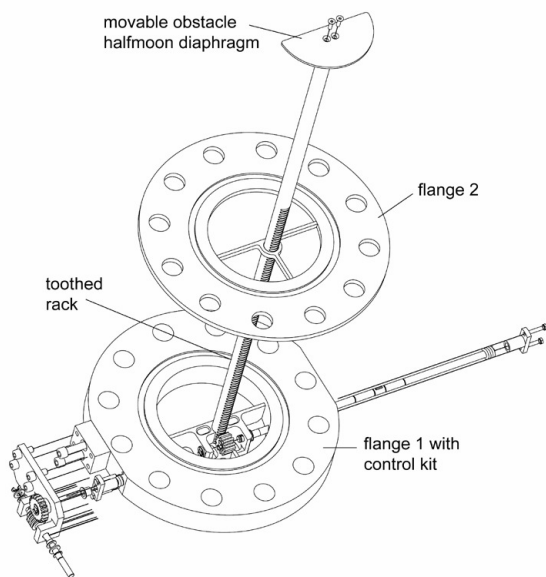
Sketch of the movable obstacle with driving mechanism - a half-moon shaped horizontal plate mounted on top of a toothed rod
